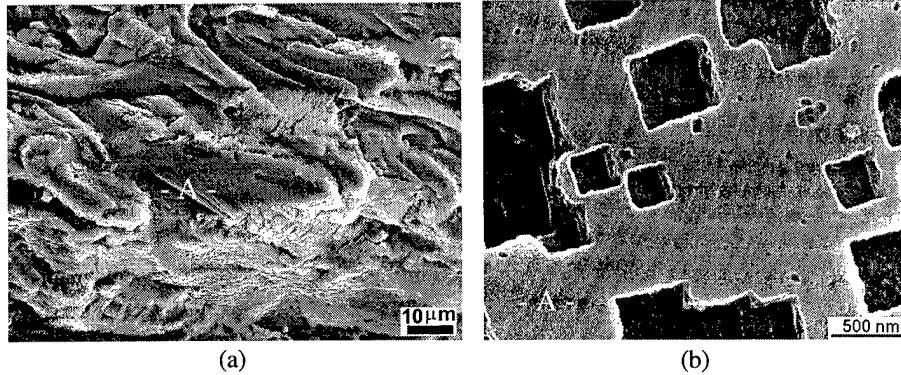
Fracture surface morphology in dehumidified air at $\Delta K = 9 \text{ MPa m}^{1/2}$ showing a) tortuous fracture surface morphology and b) etch pits revealing that fracture occurred along $\{001\}$ planes. Crack growth is from left to right [11].
